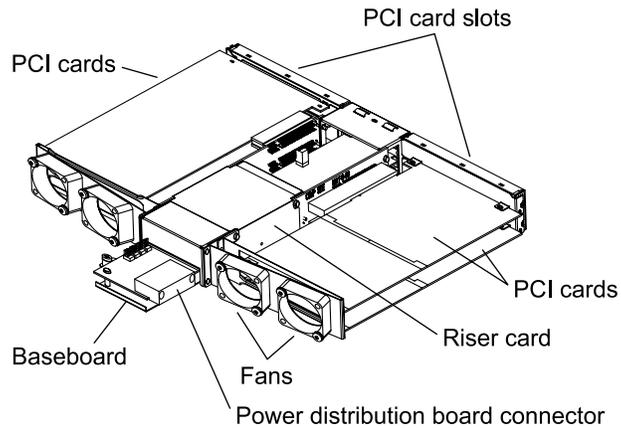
Netra E1 PCI System Expander PCI Card Cage
